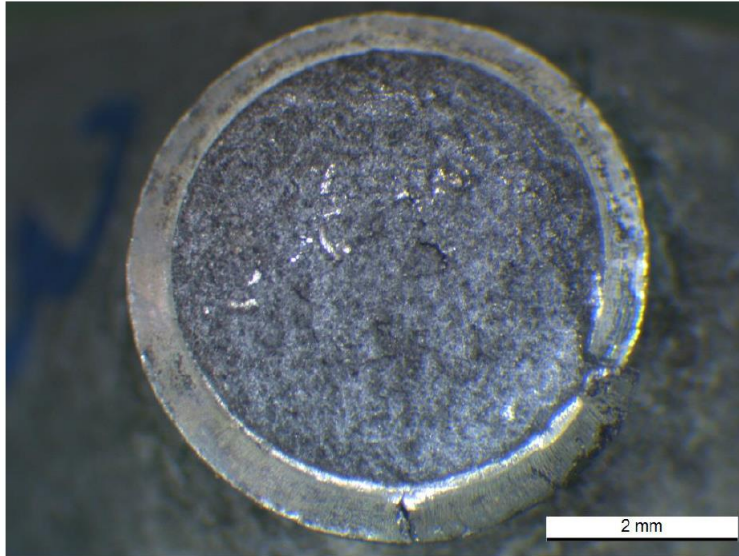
Aft right hand steering rod fracture surface in cleaned condition.
